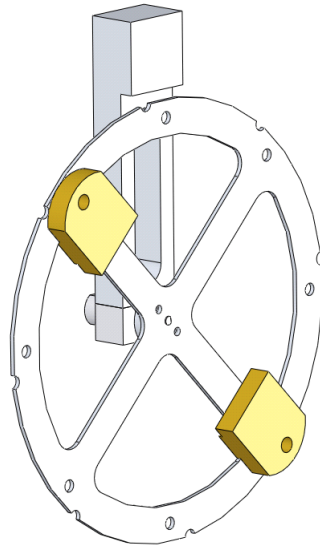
A CAD rendering of an early prototype using a DC gear motor.
